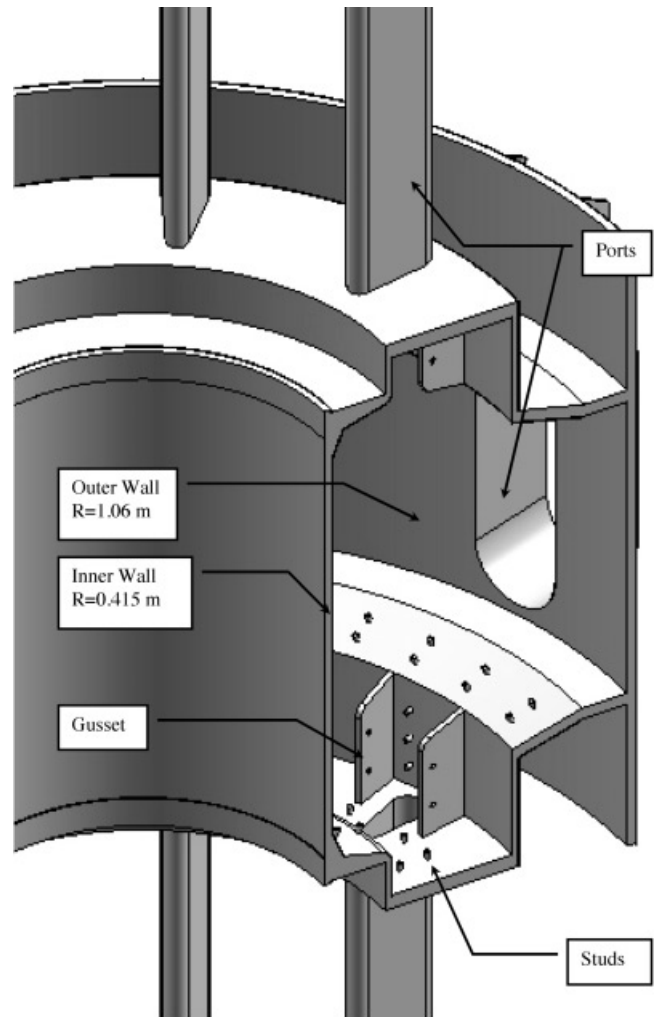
Cutaway view of the Alcator C-Mod vacuum vessel. The cylindrical and annular components are welded together to form the vessel.
